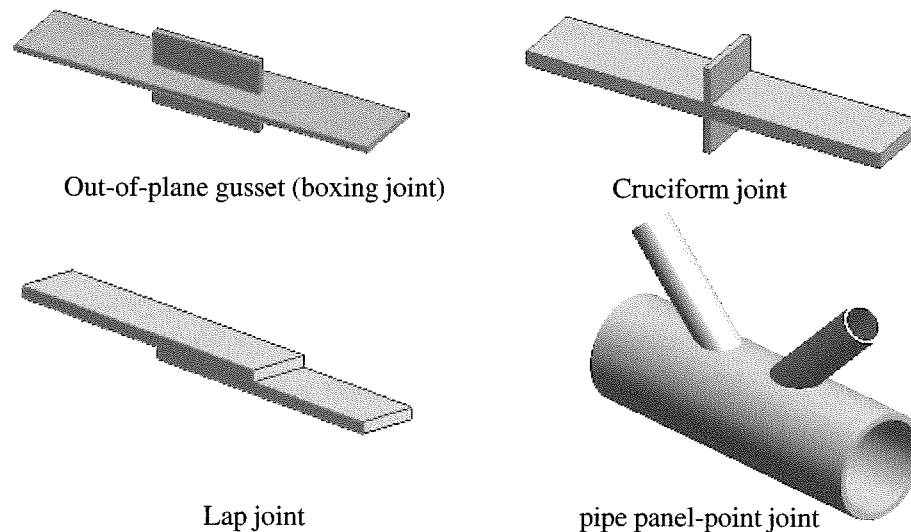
Fatigue improved weld joint details by LTT
